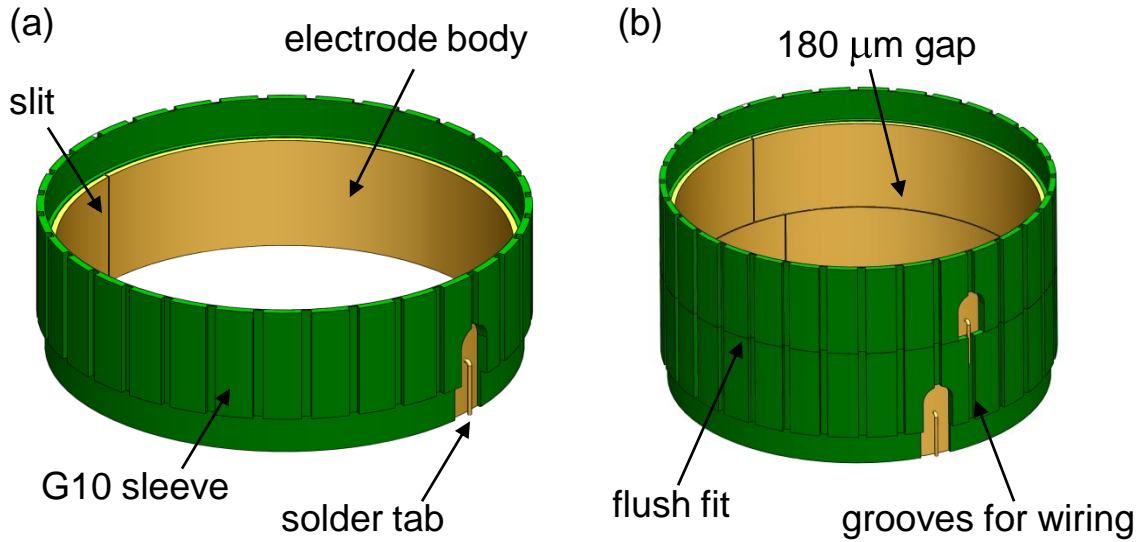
(a) Drawing of a single Penning trap electrode, showing the conductor, G10 support sleeve, vertical, slit, and solder tab for attaching the voltage lead. The single-electrode assemblies are stacked (b) to build the complete Penning trap. A $180\text{ }\mu\text{m}$ gap separates the electrodes.
